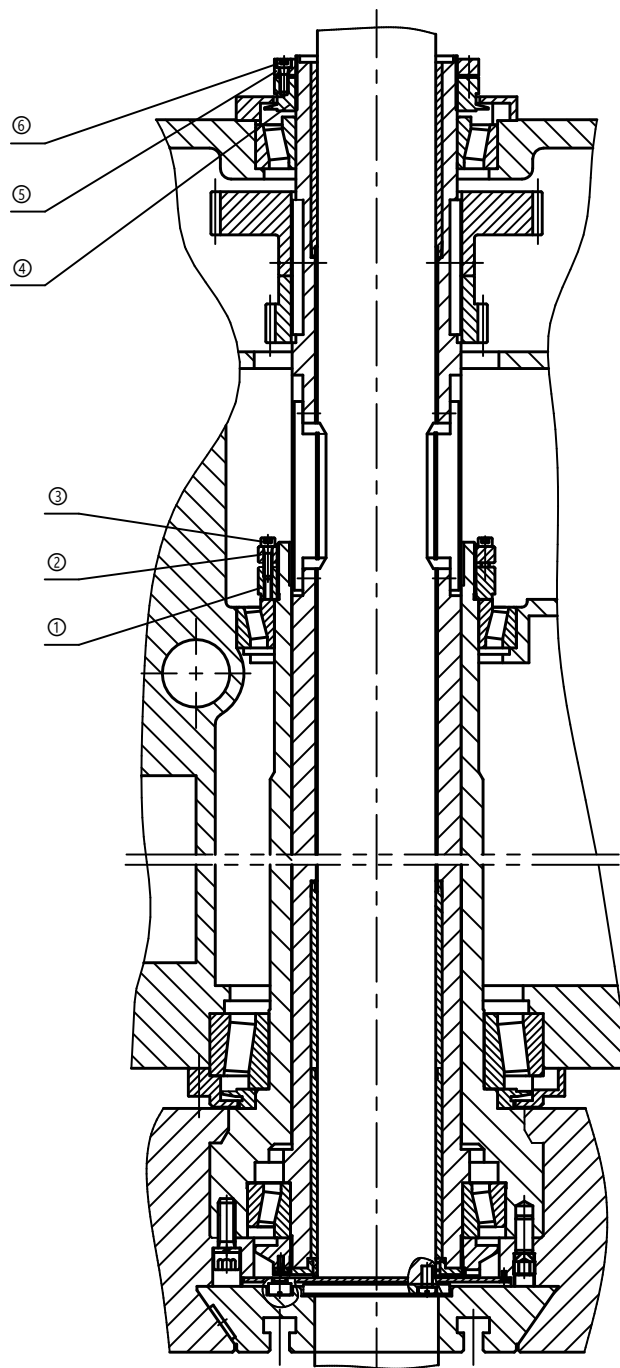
Diagram of spindle structure for machine model TPX6111B,TPX6111B/2,TPX6111B/3
